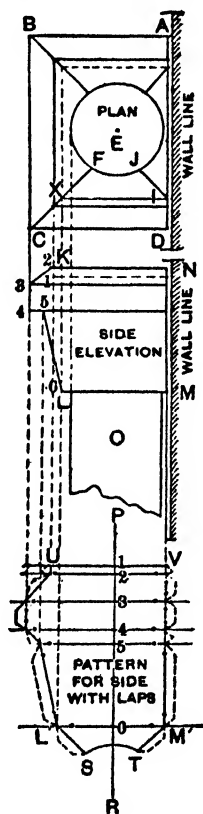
Plan, Elevation and Pattern for Sides of Leader Head with Round Pipe
